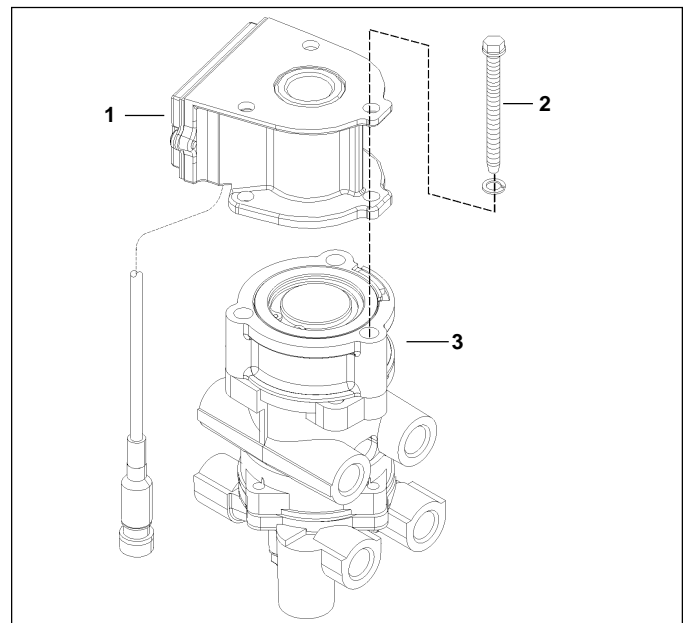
RETARDER BRAKE VALVE EXPLODED VIEW
